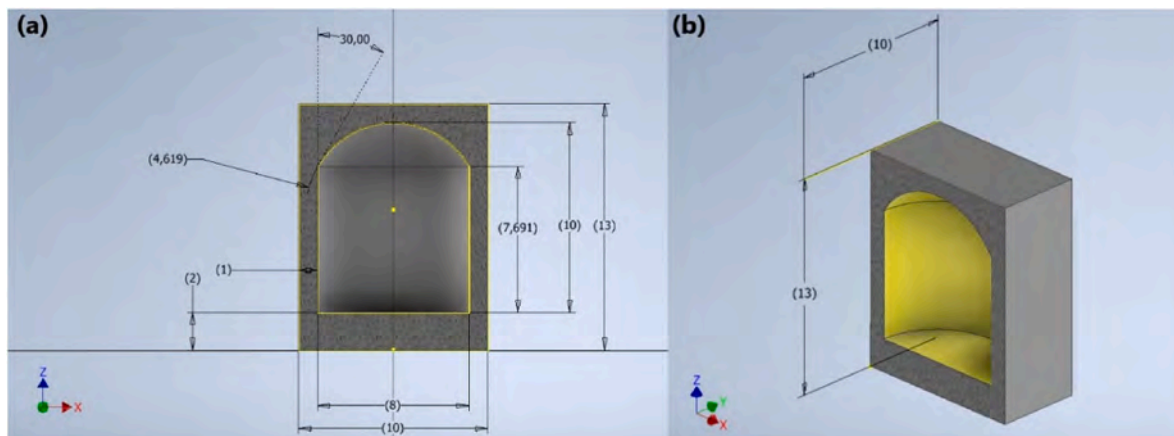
Graphic representation of printed samples' cross sections in 2 d (a) and 3 d (b). The figure shows the most relevant dimensions of the samples.
